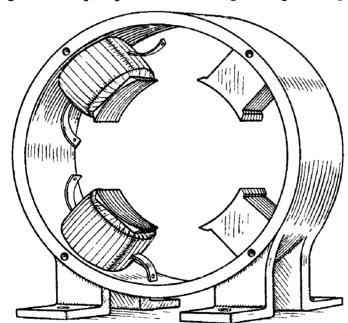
, Chap. IV.—Carcase with pole pieces and field winding.
